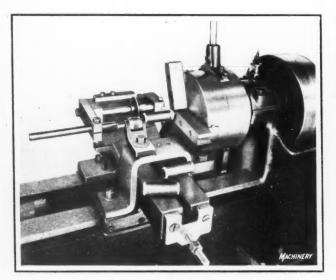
Machine tooled for taking Various Cuts on the Front End of Automobile Crankshafts
